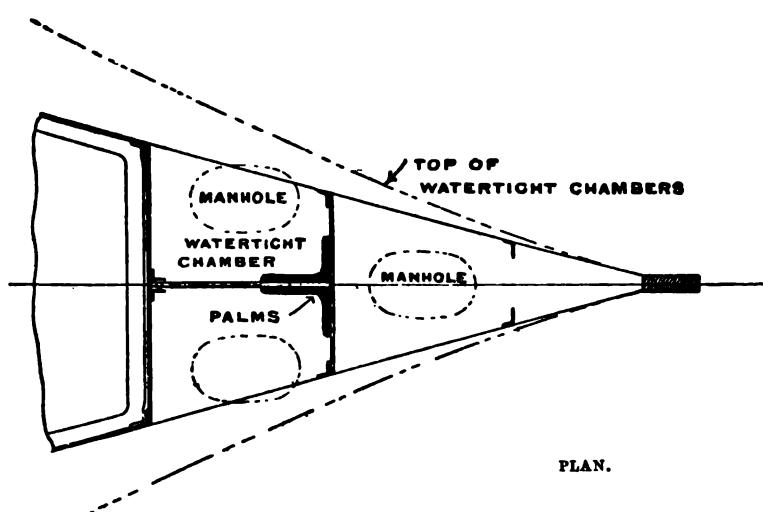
Struts carried through Shell Plating into Watertight Chamber.
